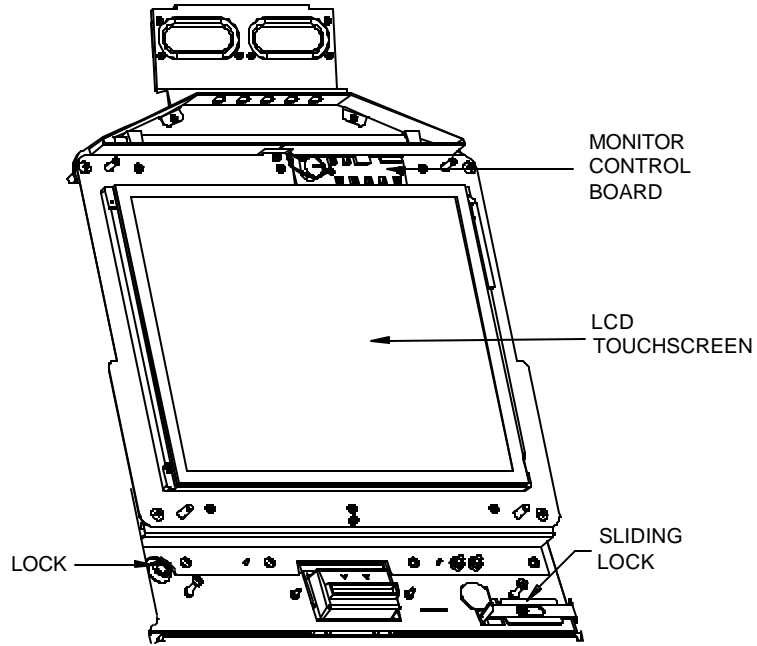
DETAILED VIEW OF MONITOR ASSEMBLY
